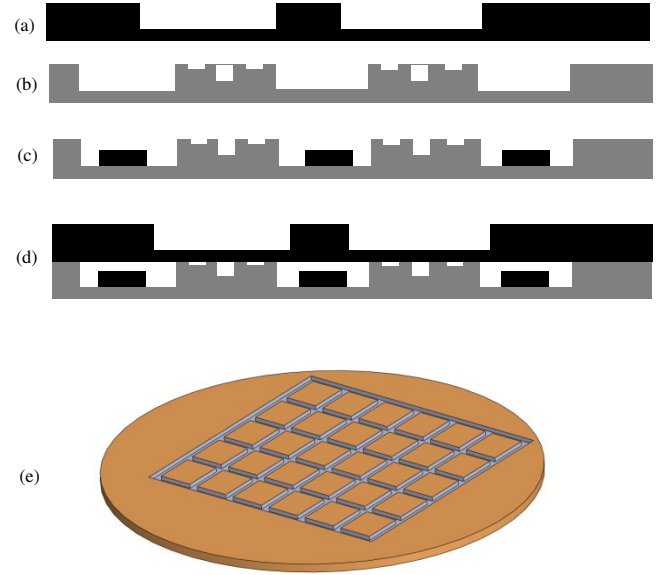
(a) and (b) Macro-machining a titanium wafer to fabricate the cap and substrate (c) Mounting the MEMS device on the substrate and wire bonding to GCTs (d) The cap and substrate are brought together by using a vacuum chuck (e) Schematic of the packaged wafer.
